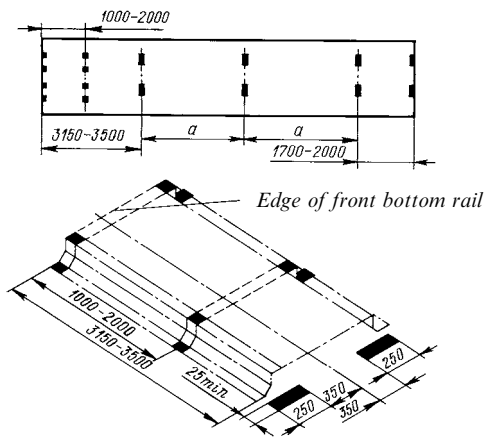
Load transferring areas (in 1AAA, 1AA, 1A and 1AX containers with gooseneck tunnel)
